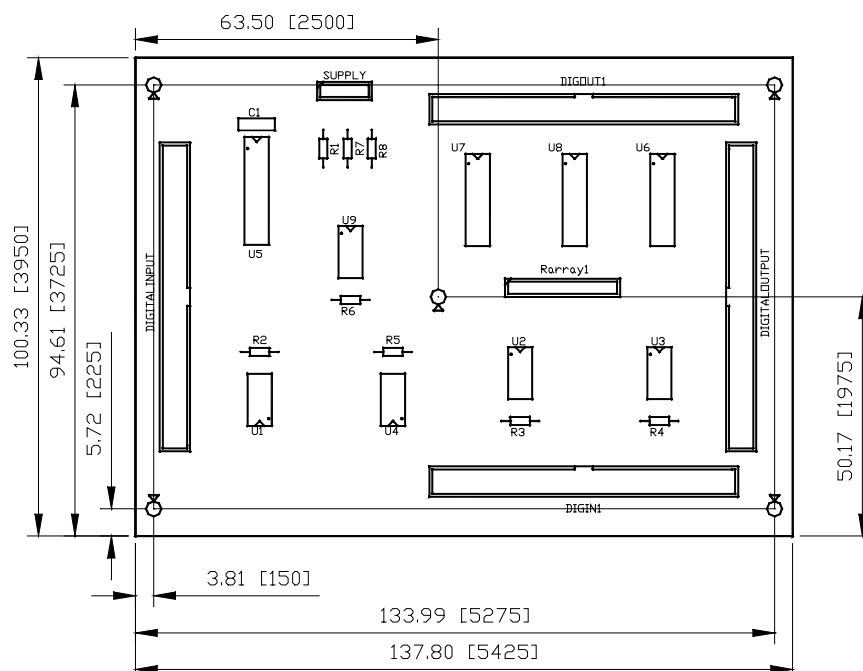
Axis1 Interface Board layout. The measures are in millimeters (mils in brackets).
